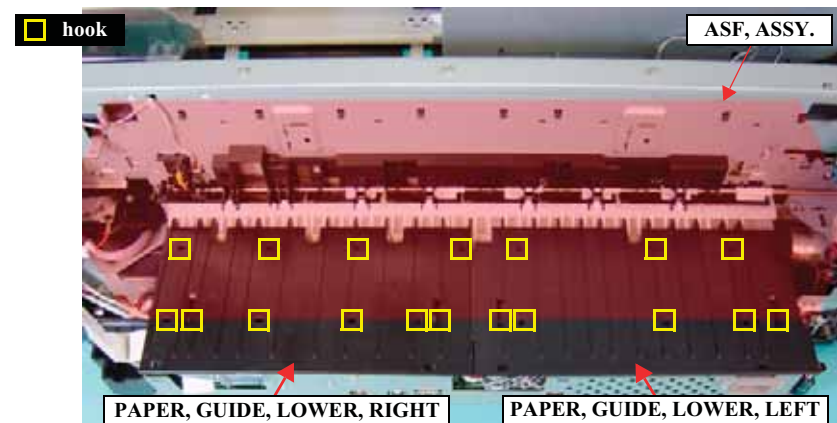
Removing the PAPER, GUIDE, LOWER, LEFT/RIGHT
